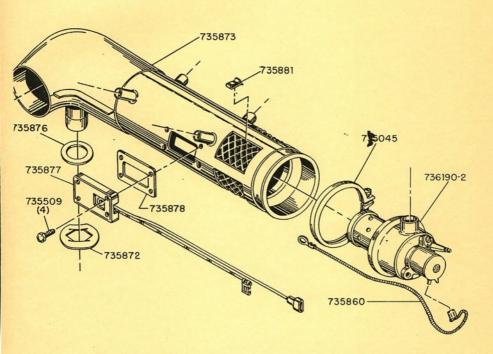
HEATER ASSEMBLY FOR KIT MODELS 735900 & 8341
